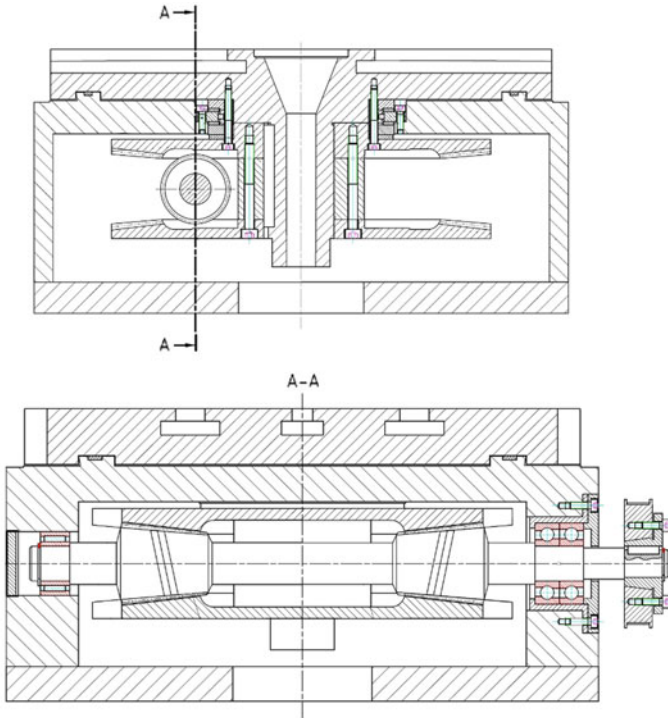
Rotary table disc driven by the two conical gears attached to the same shaft, that work together with one conical face gear
